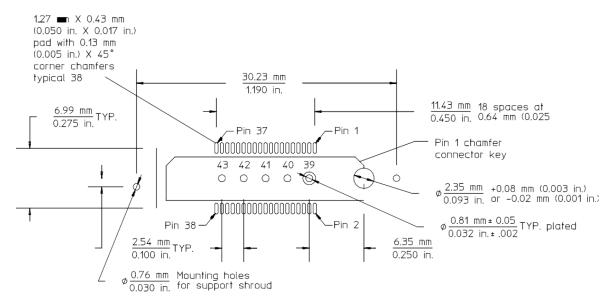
38-pin MICTOR connector footprint and support shroud mounting hole dimensions
